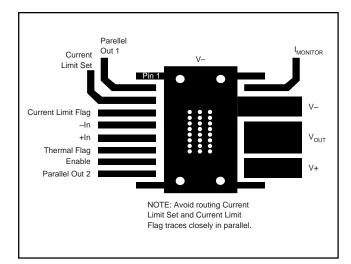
20-Pin DWP PowerPAD PCB Etch and Via Pattern.
